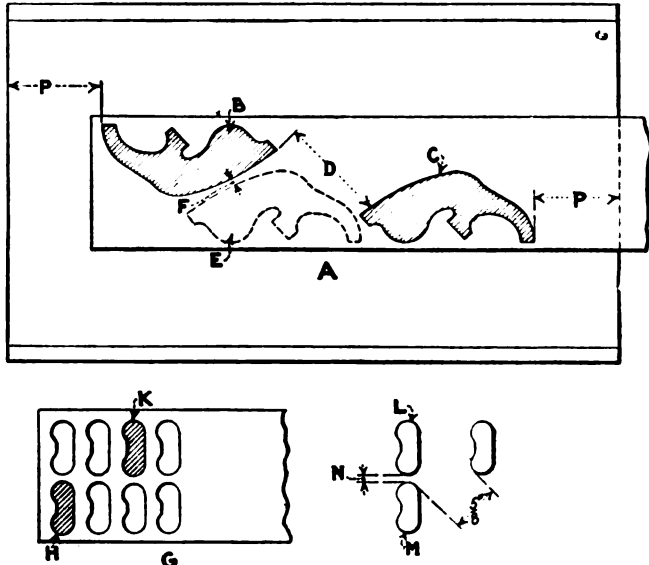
DOUBLE BLANKING DIE LAYOUTS
